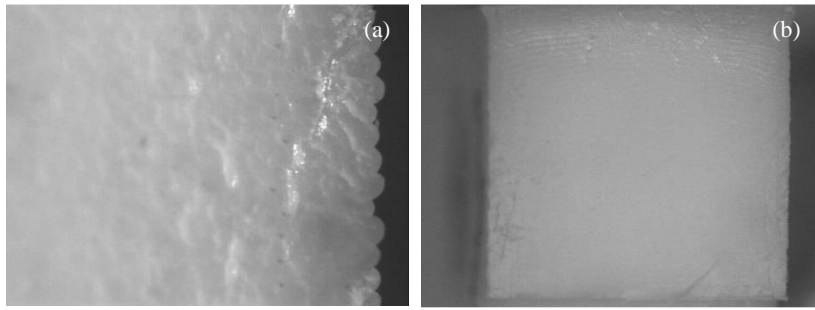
Detail of the fracture surface of the specimens, in the upper range of life: (a) 50× magnification; (b) 6×.
